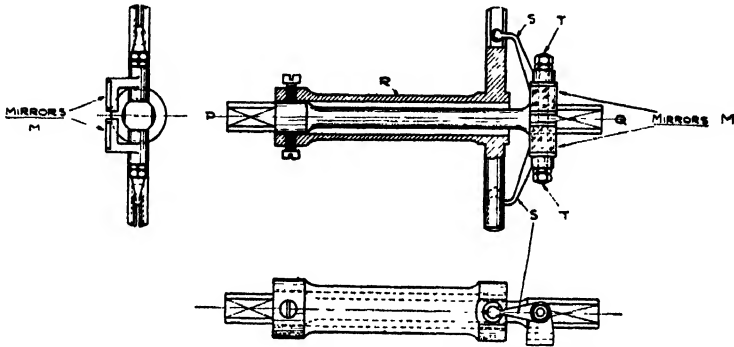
TORSIONMETER OF N.P.I. TORSION FATIGUE MACHINE
